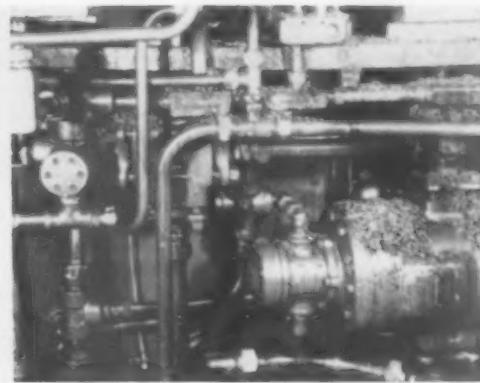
Lack of protection from chips and dirt is prominent in this example of a pre-JIC machine.
